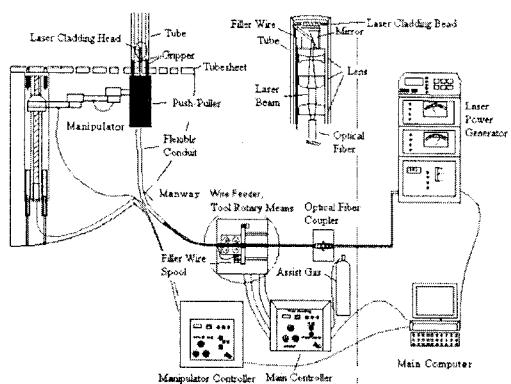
Laser cladding repair system for steam generator damaged tubes
